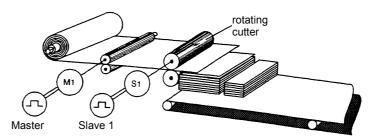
Cutting a Moving Sheet with a Rotating Cutter
